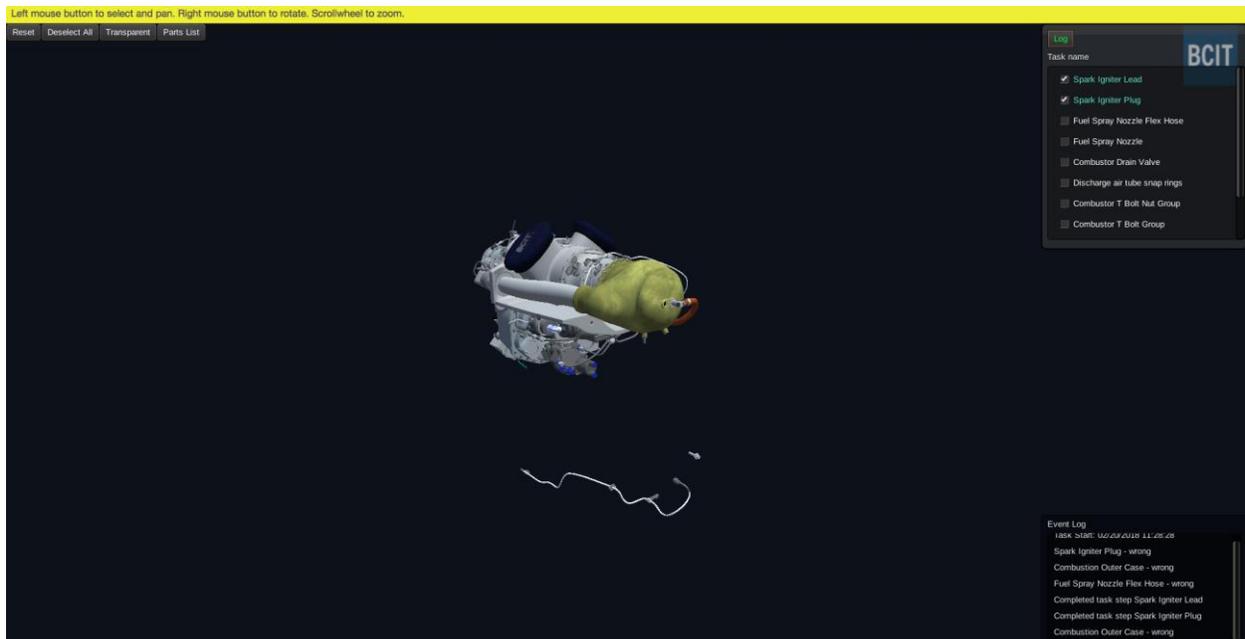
RR250 engine in model viewer browser app set up for disassembly task
